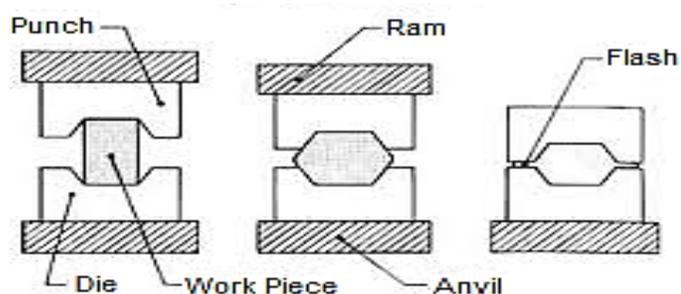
Drop Forging (Closed - Die - Forging)
